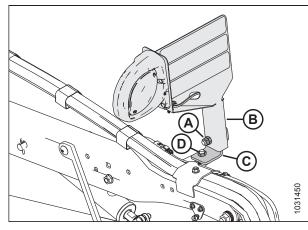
Right Light Assembly in Shipping Position – D1XL Headers
